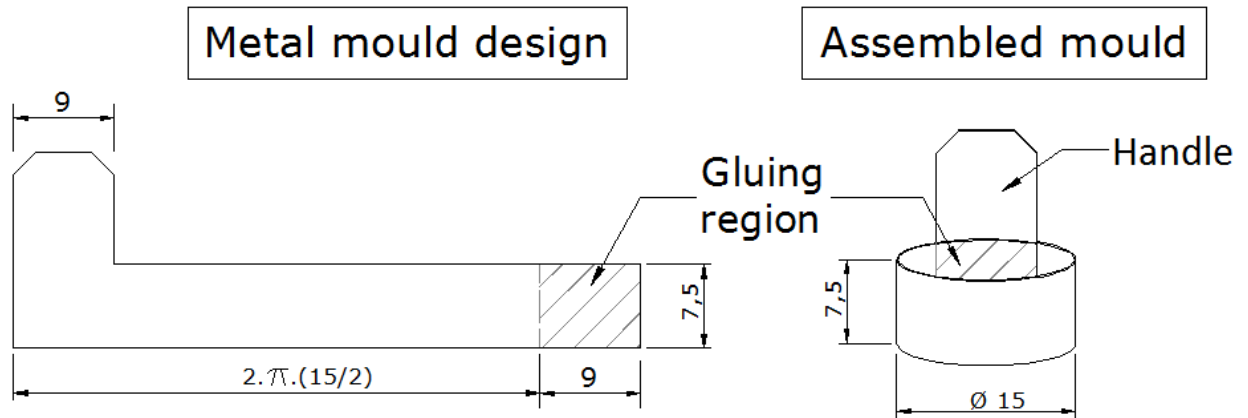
Metal mould design with a handle part used for excavating BE cavities in specimens
